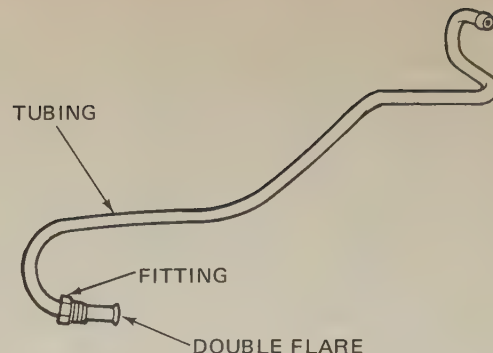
A fuel line, used to carry gasoline from the fuel pump to the carburetor.
